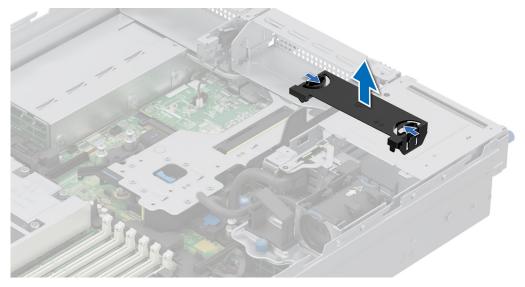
Removing the EDSFF E3.S rear drive module air shroud
